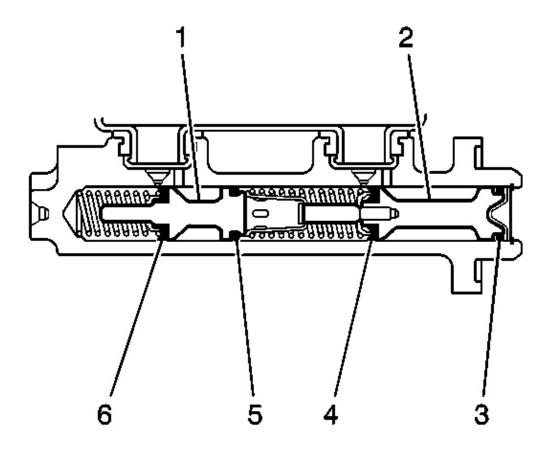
Cross Sectional View Of Brake Master Cylinder Courtesy of GENERAL MOTORS CORP.
